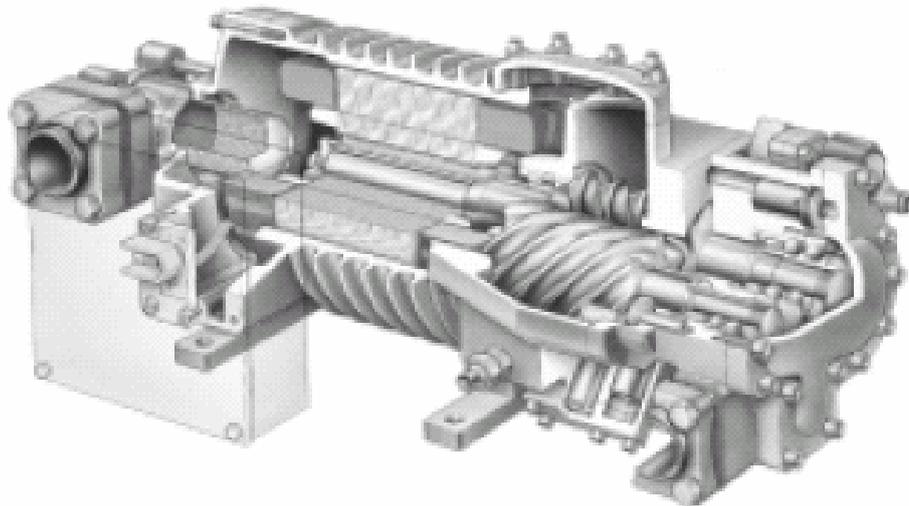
Cut view of a semi-hermetic, single-screw compressor
